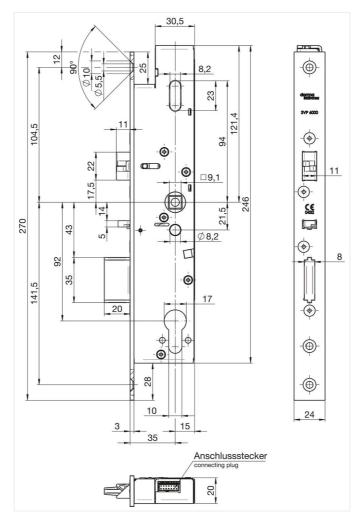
Detailed technical drawing illustrating the dimensions and mounting points of the DORMAKABA SVP 6710 lock. All measurements are critical for proper installation.
